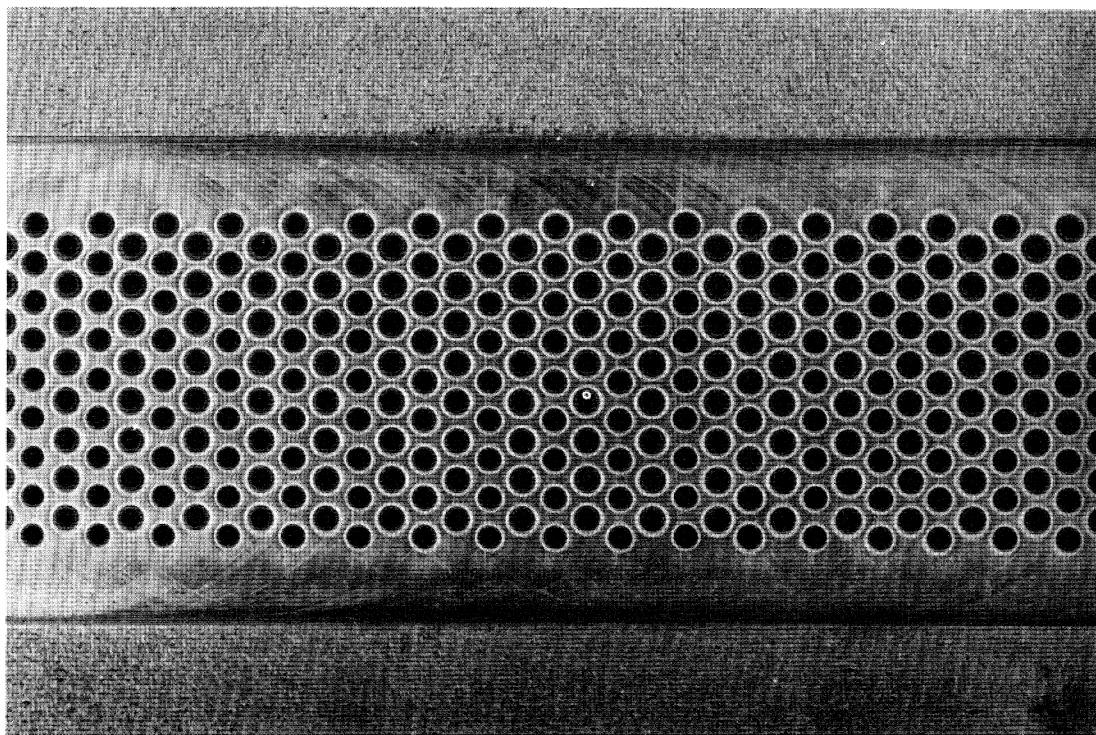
Density of holes possible with electrojet machining. (Magn.  $\times 6$ .) (Courtesy Rolls-Royce Ltd.)
